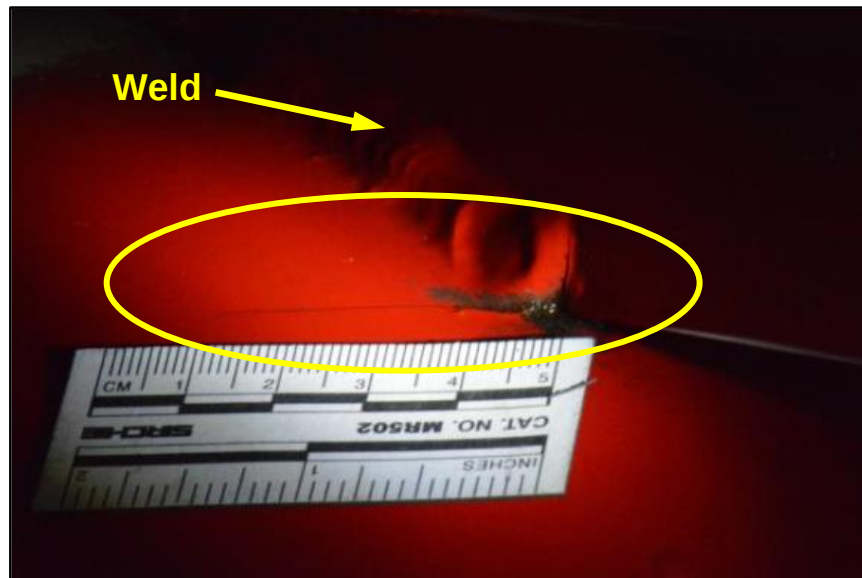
Appearance of the opposite side of the weld shown in Figure 4 (yellow arrow), and the crack perpendicular to it (yellow circle).
